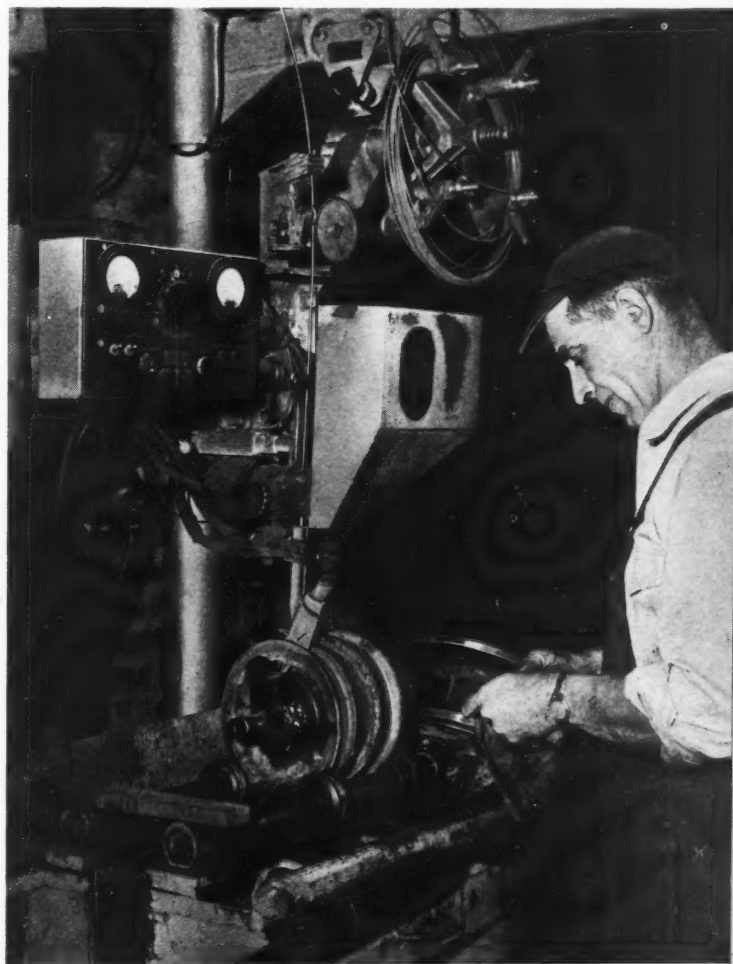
Hard-facing track rollers in an automatic welding machine. A flux-submerged arc is used. The alloying constituents are contained in the hollow wire
